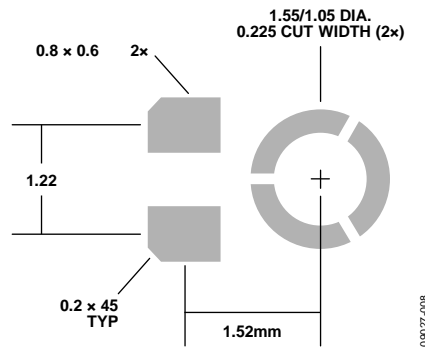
Suggested Solder Paste Stencil Pattern Layout
